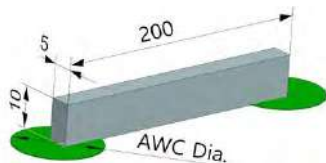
PEEK 3D Printing specimen (unit : mm)
